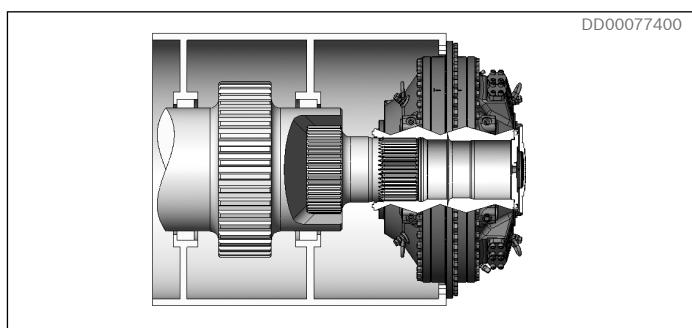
Flange mounted motor with splines and high radial load from driven shaft.
